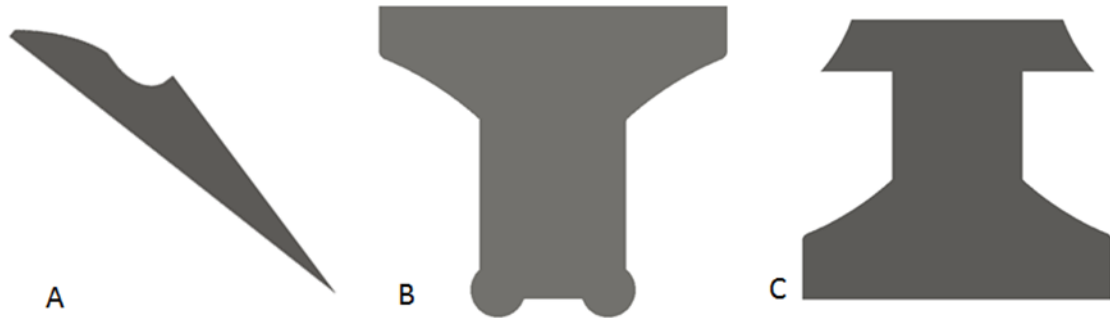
CAD inputs used in the mesh generation module A) Gear tooth profile B) HP relief groove C) LP relief groove.
